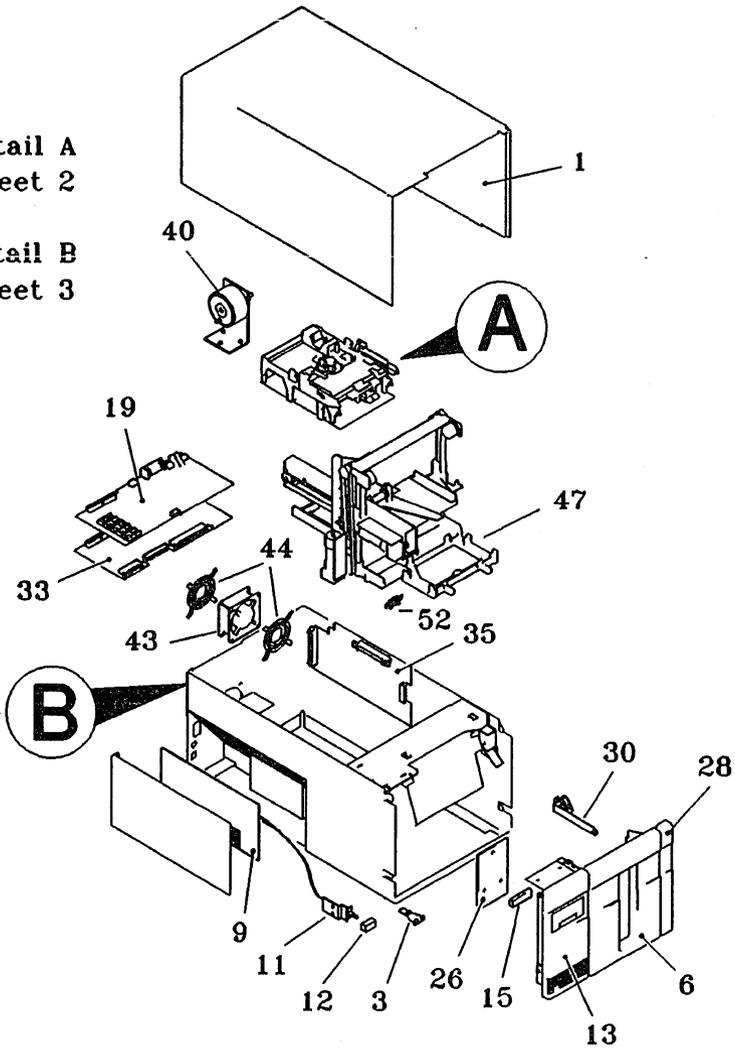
HP 35401 Exploded View (sheet 1 of 3)
